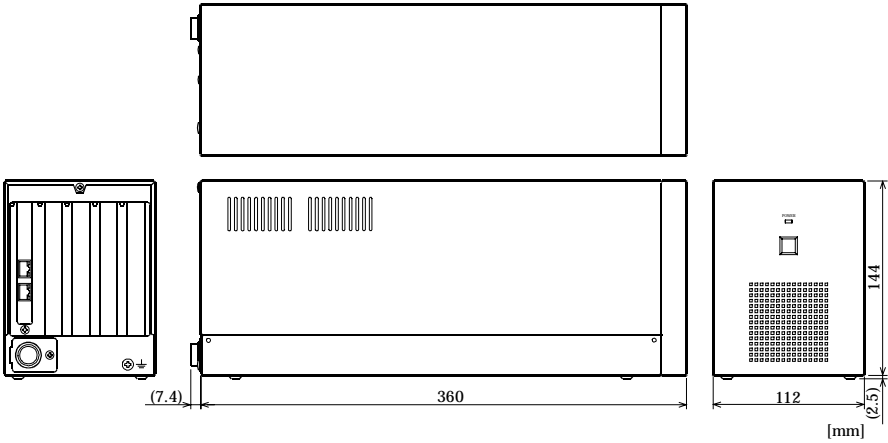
Outside Dimensions < ECH(PCI)SF-F4B >
